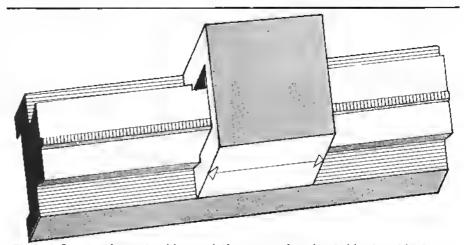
Our stepping motor drives a platform or carriage (center) back end forth along a 2' track. The motor (hidden behind the carriage) drives a pinion which engages a rack gear embedded in the track. Laser mirrors are mounted on top of the platform, end cen be positioned precisely under the computer's control.
